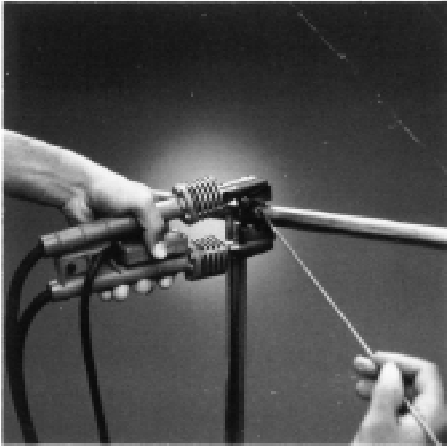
Electric Resistance Hand Tools Suitable for Soldering Copper Tube
